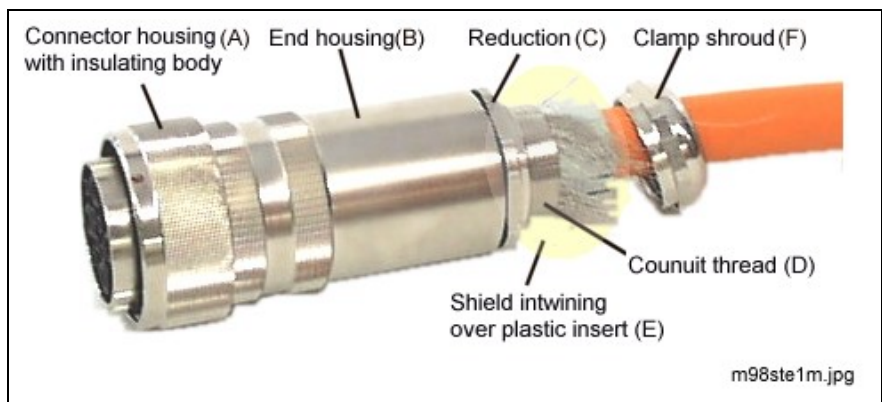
Assembling conduit thread plastic insert INS0481, -0482, -0486
